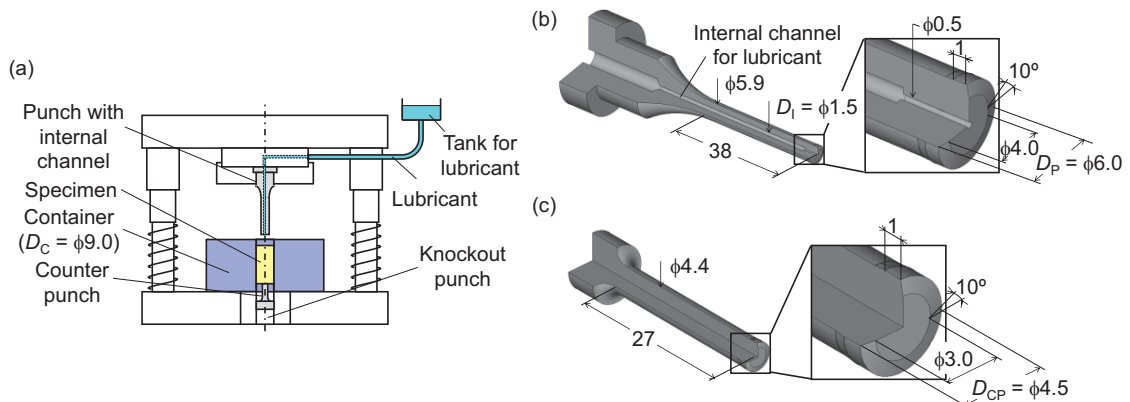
Schematic illustrations of tool arrangement and punches for combined forward-backward extrusion: (a) tool arrangement (D_C : inner diameter of container); (b) punch with an internal channel of lubricant (D_P : punch diameter, D_I : diameter of internal channel); (c) counter punch (D_{CP} : counter punch diameter).
